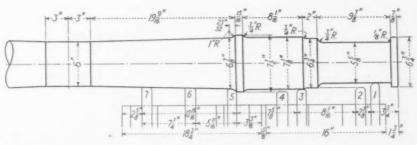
Arrangement of tools on right-hand carriage of roughing lathe to rough turn a $51/2 \times 10$ in. axle.
